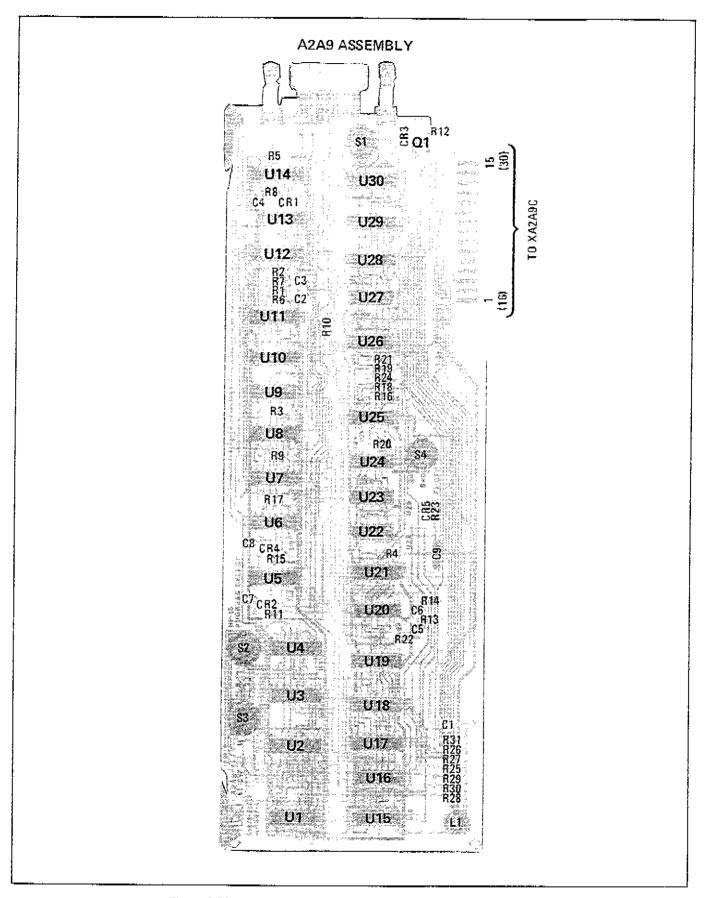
A2A9 HP-IB Address Assembly Component Locations
